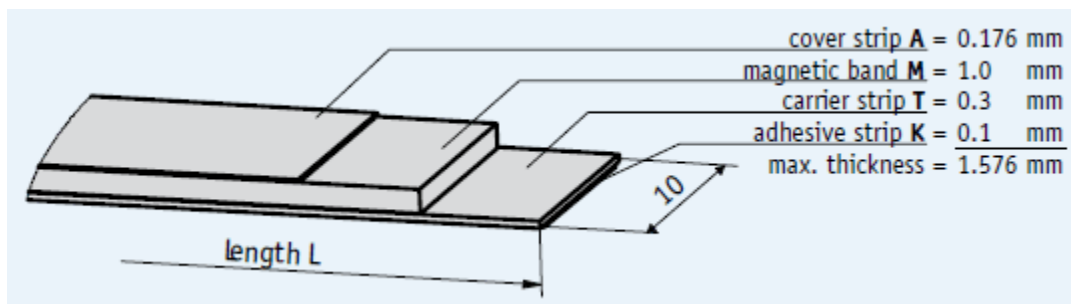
Dimensional drawing of MB200 Magnetic Grid Ruler
